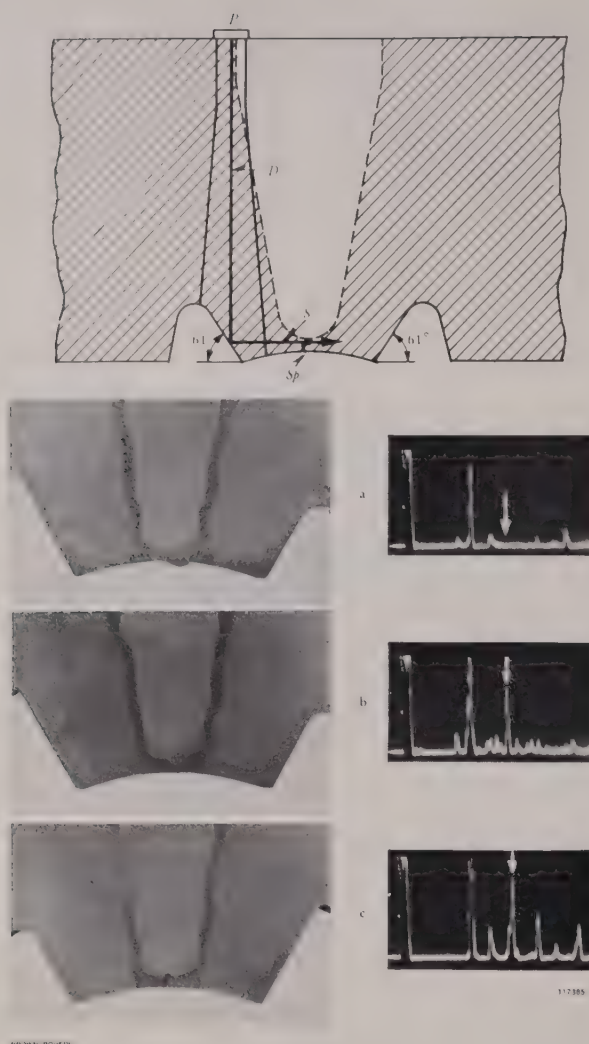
Check on the root weld with ultrasonic waves; deflection method
